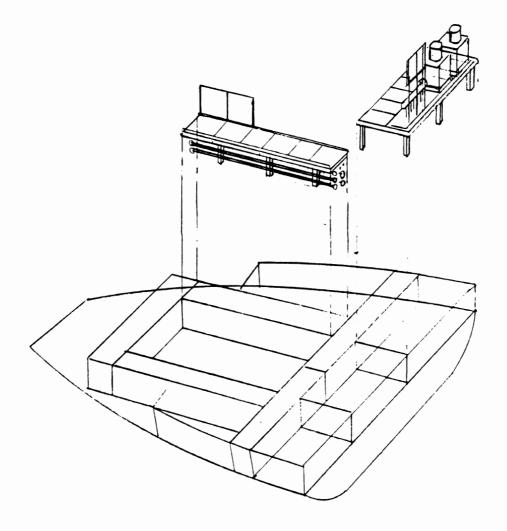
Advanced outfitting unit models used to build up space model.
